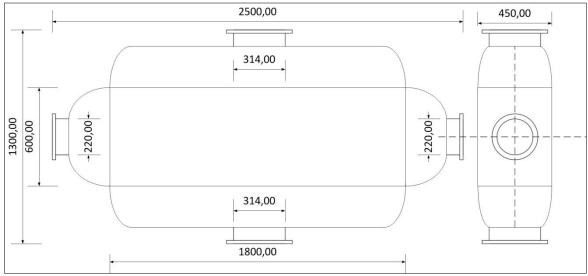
Indirect cooling: printed circuit dimensions, with heads and nozzles
